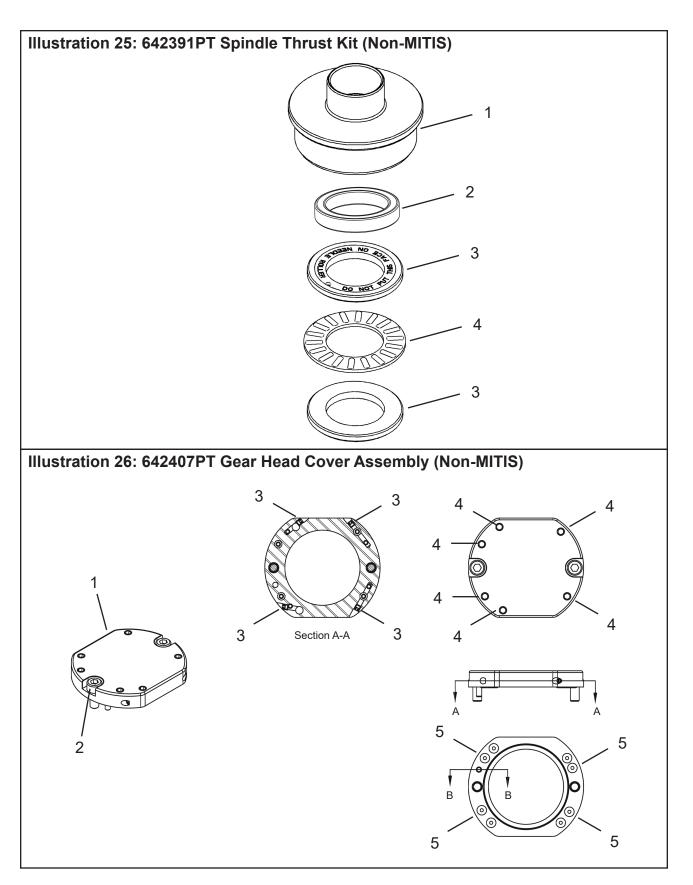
" - 642391PT	Spindle Thrust Kit - Non-MITIS
